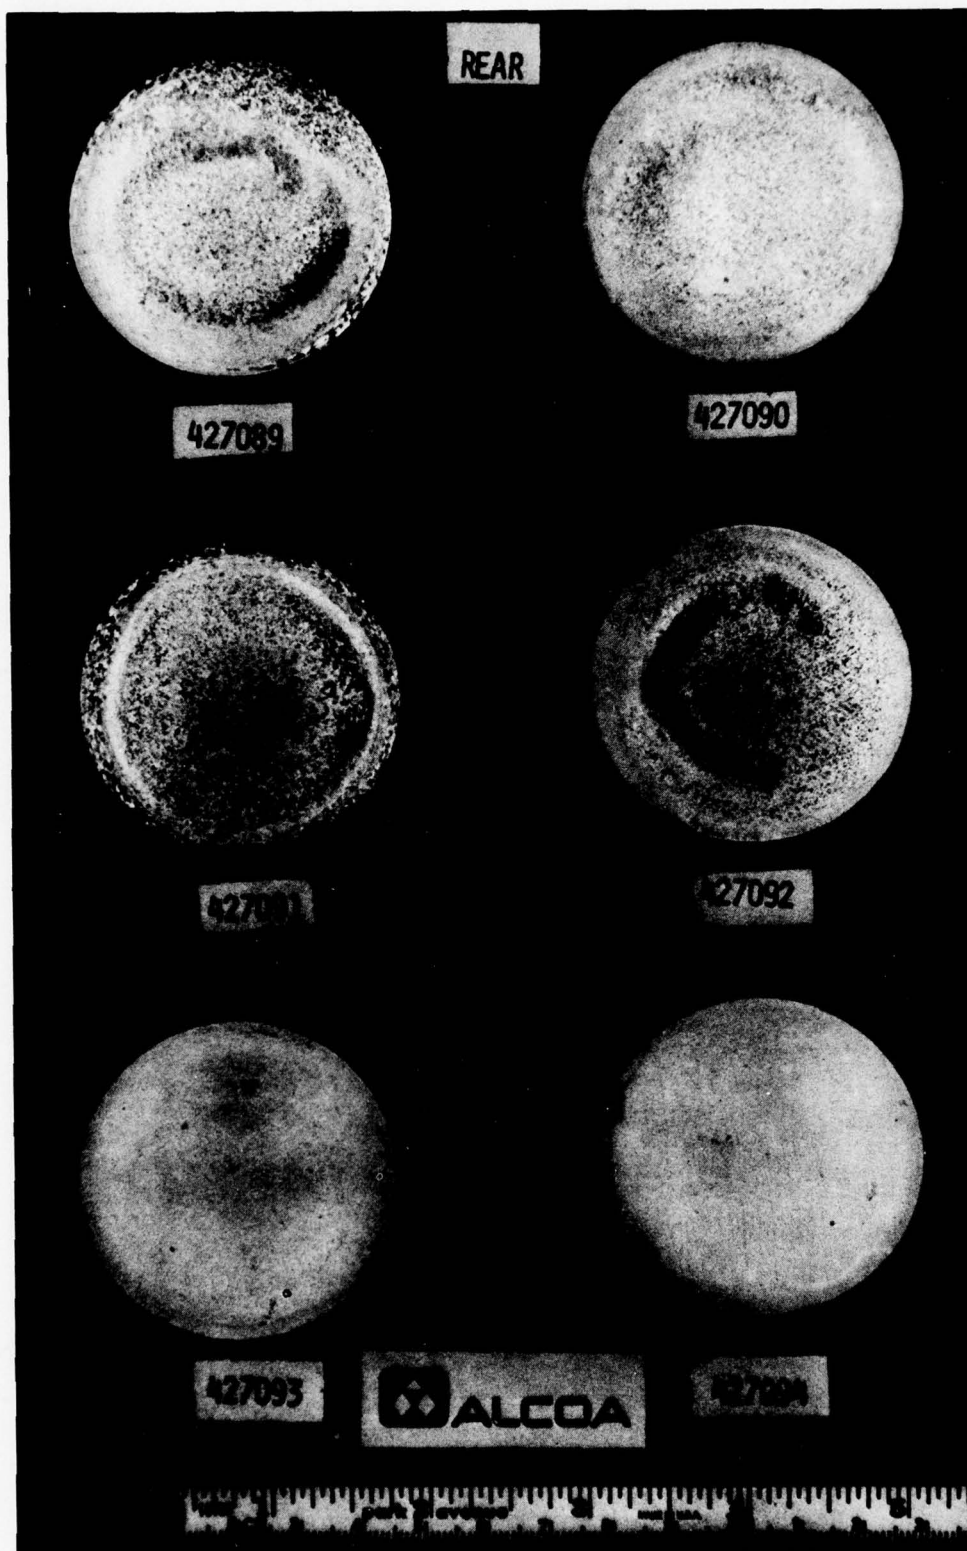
Etched Slices Removed from Rear of Al-Mg-Li Extrusions
